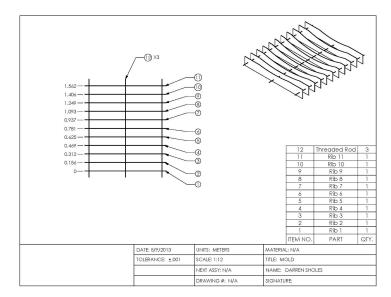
Solidworks assembly showing the complete mold for the Scheffler dish.
